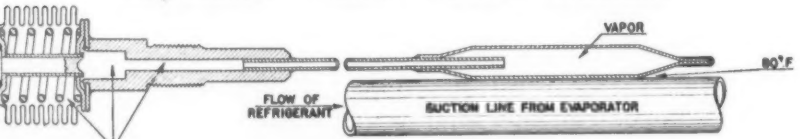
Cross-section of expansion valve power element, showing power element bellows, tube, and bulb assembly.
